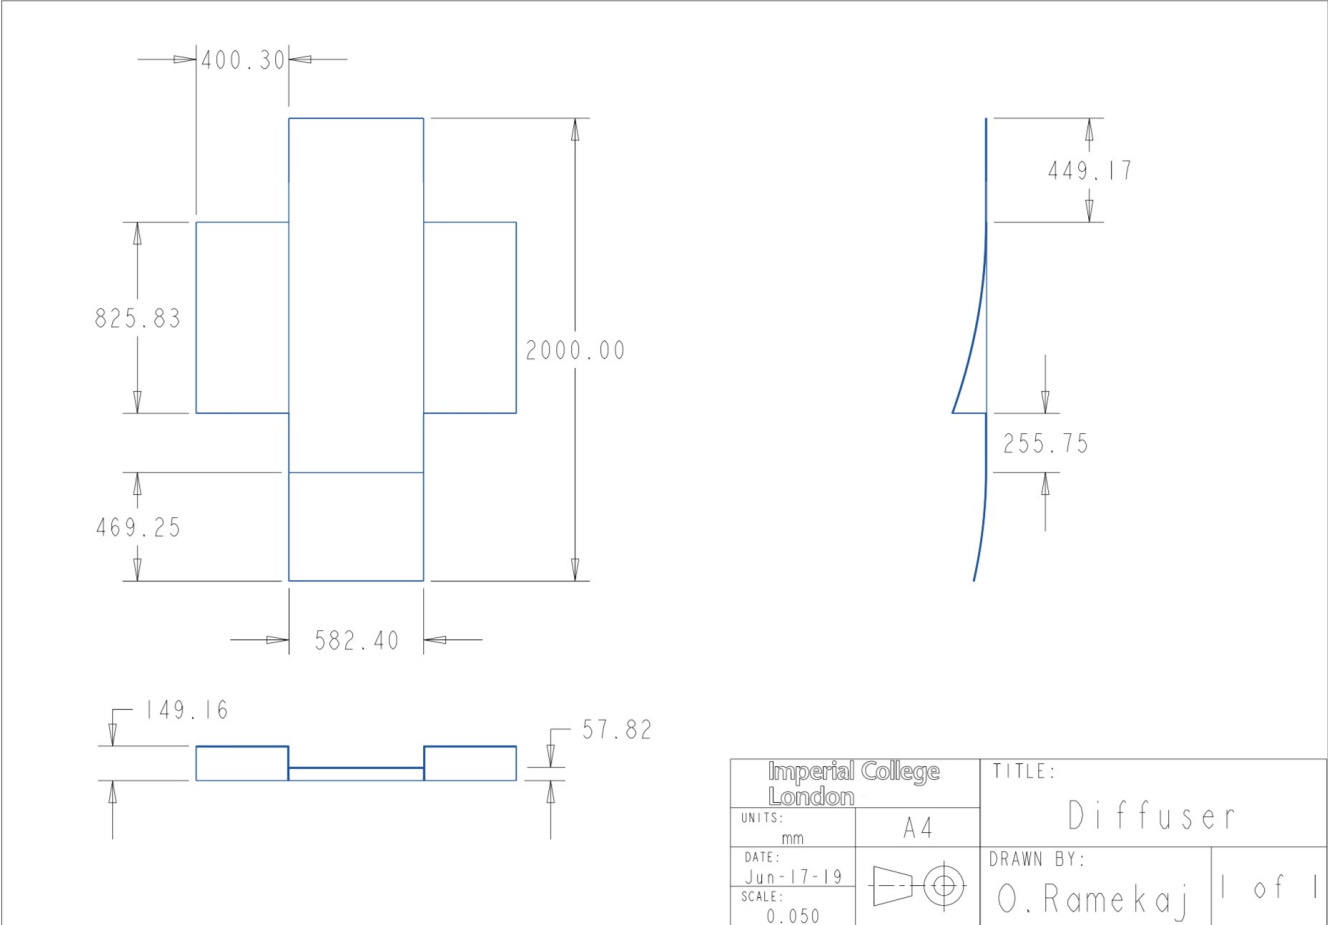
Final Diffuser Three View Drawing by Ramekaj [1]
